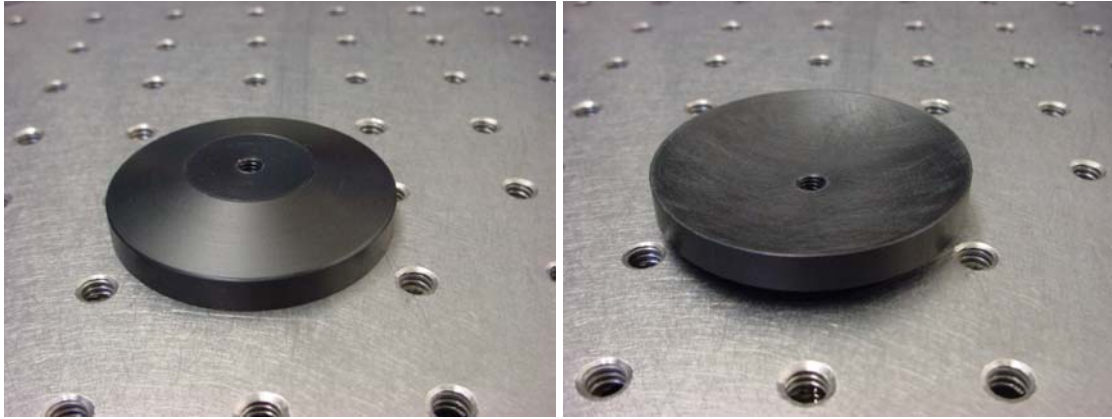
Driver Cup. The top of the driver cup is shown on the left and the bottom is shown on the right.
